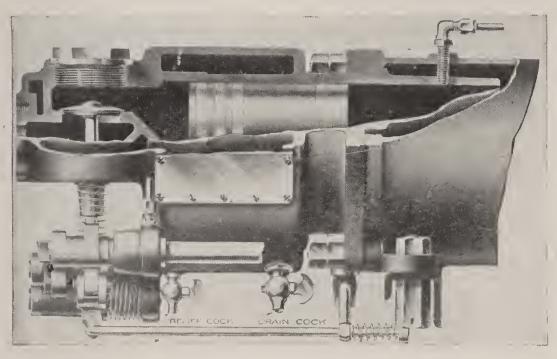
End view of Horizontal One-cylinder Motor, showing piston, valves and valve mechanism.
